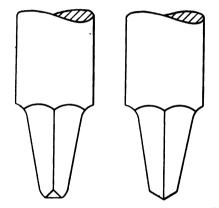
Matrix-engraving cutter; American Type Founders Co.
